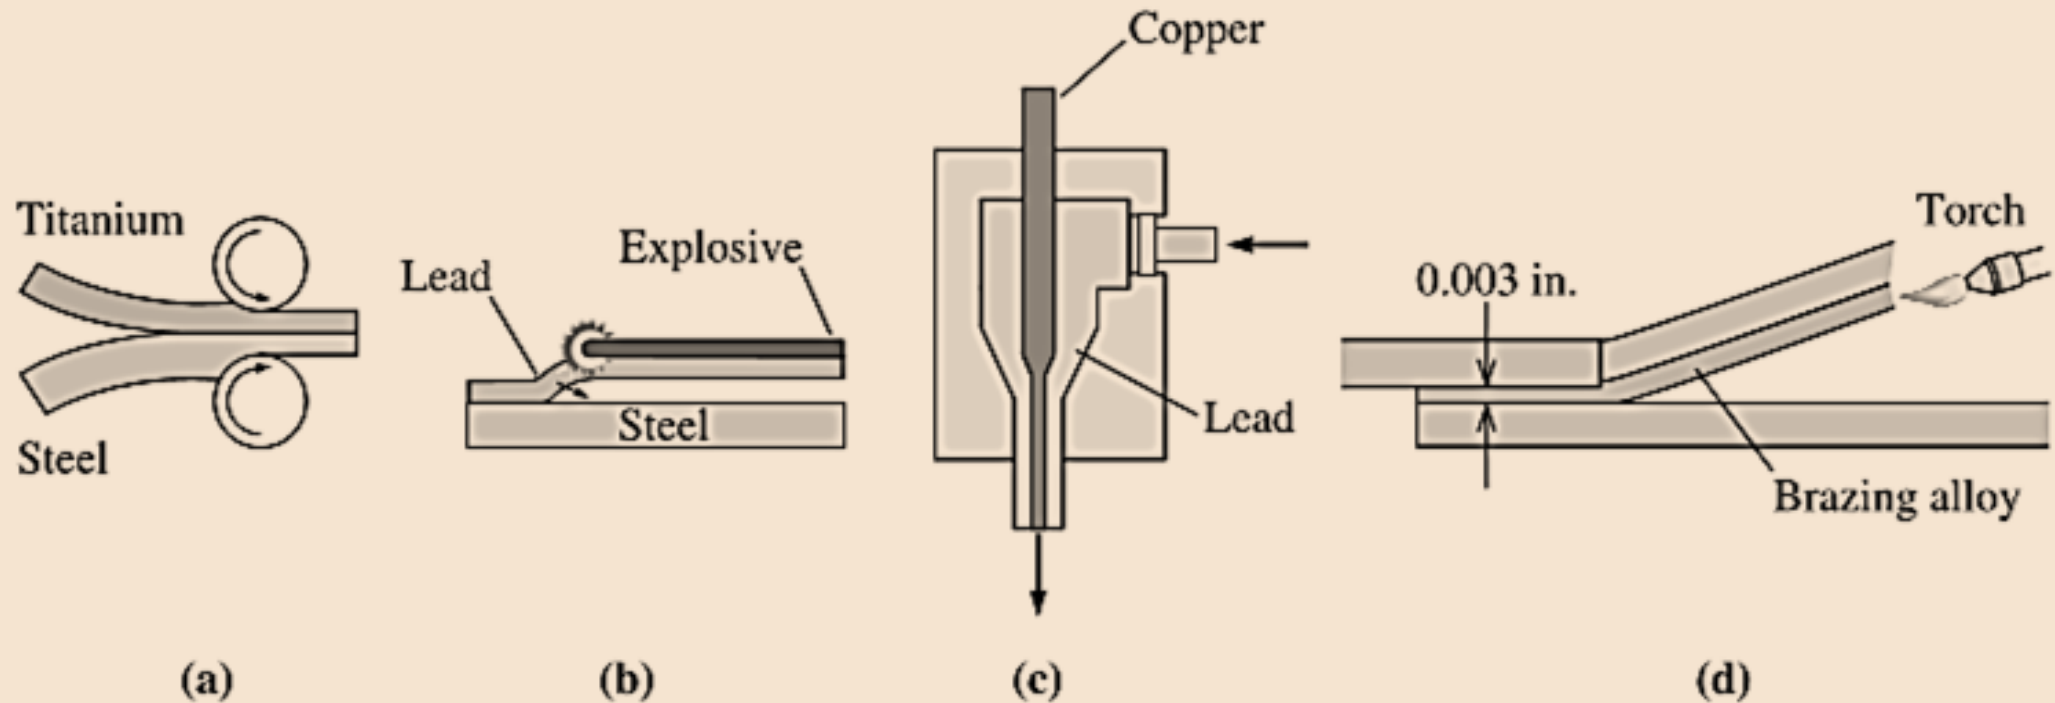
Techniques for producing laminar composites: (a) roll bonding, (b) explosive bonding, (c) coextrusion, and (d) brazing.
